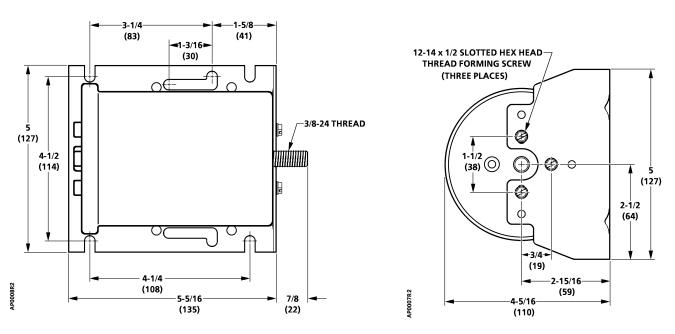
No. 3 Actuator with Fixed Mounting Bracket Dimensions. Dimensions are in Inches (Millimeters).
